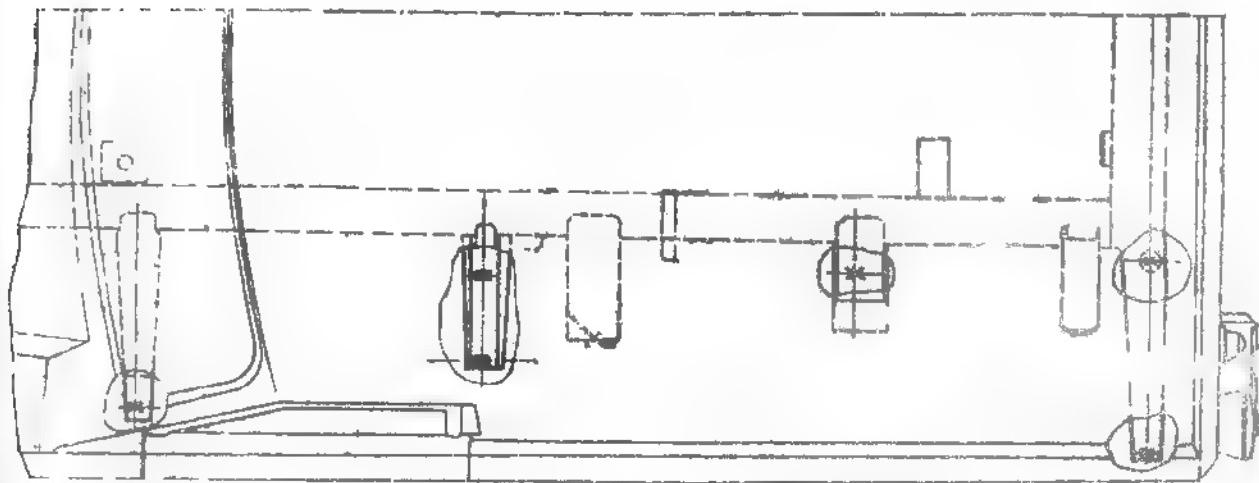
BODY MOUNTING POINTS ON CHASSIS FRAME
